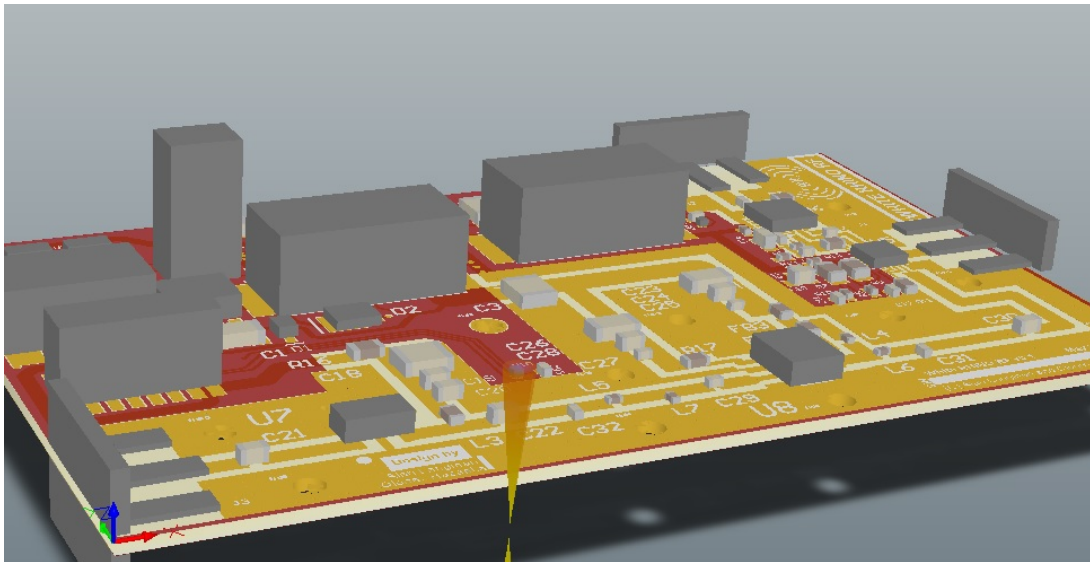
White RHINO RF Complete PCB - 3D View
